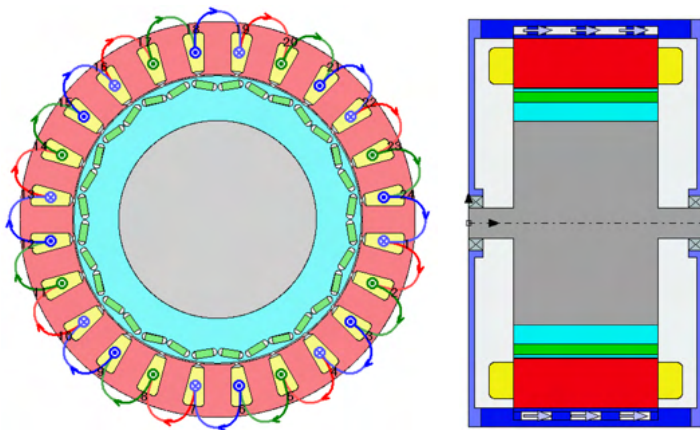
Radial machine cross section with winding pattern (left), axial machine cross section with housing Wj (right)
